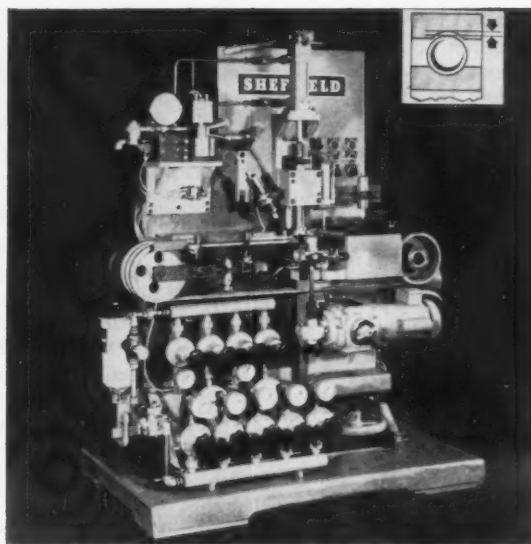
Automatic radial play "Chekmatic" gage added to Sheffield line of bearing gages
